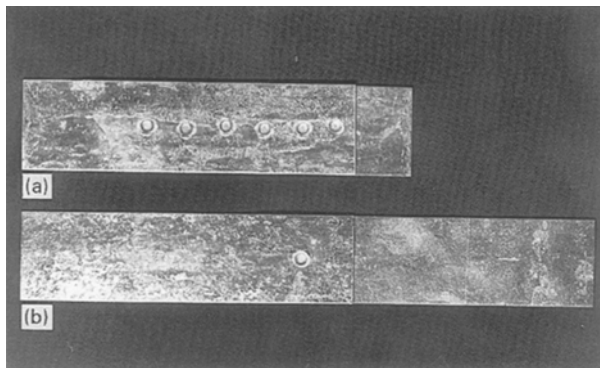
Weld test specimens. (a) peel test; (b) tension shear test.
